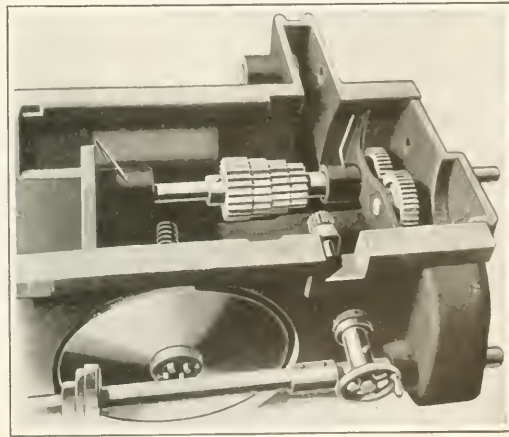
View of Mechanism in Bed with Cover removed—Attention is called to Oil Pipes leading to Bearings
